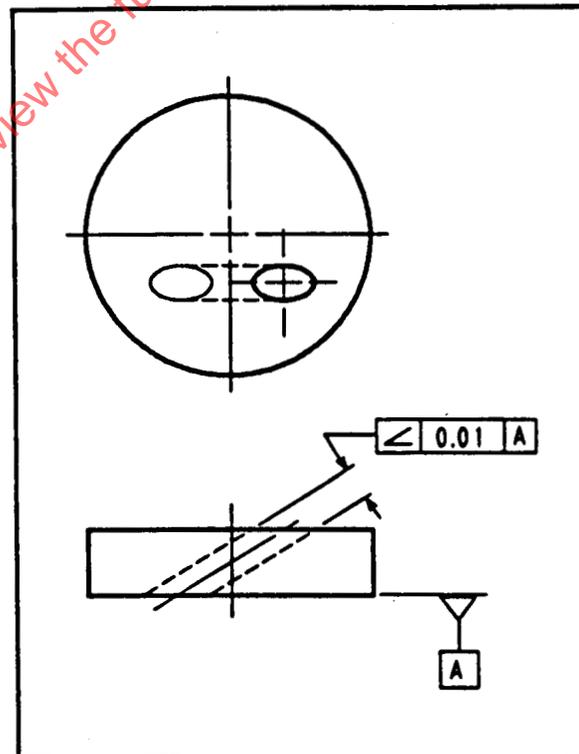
PLANAR ANGULARITY OF AN AXIS; PRIMARY DATUM PLANE; NO SECONDARY DATUM SPECIFIED
